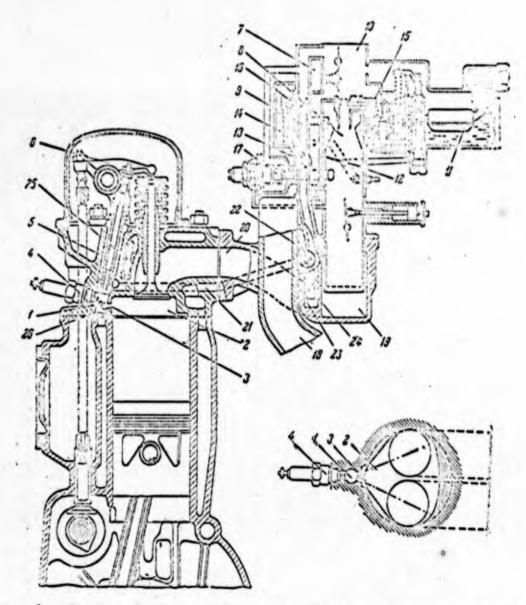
Design drawings of a precombustion chamber carburetor engine: 1 - precombustion chamber; 2 - main combustion chamber; 3 - passageway valves; 4 - spark plugs; 5 - precombustion chamber intake valve; 6 - intake valve rocker arm; 7 - common carburetor; 8 - cylinder part of carburetor; 9 - precombustion chamber part of carburetor; 10 - common air intake; 11 - common fuel chamber; 12 - throttle for cylinder mixture; 13 - valve for the precombustion chamber mixture; 14 - pull rod drive for throttle; 15 - jet tubes for cylinder mixture; 16, jet tubes for precombustion chamber mixture; 17 - winder valve; 18 - exhaust collector; 19 - intake collector; 20 - cylinder mixture channel; 21 - precombustion chamber mixture channel; 22 - heat receiving ribs; 23 - well for precombustion chamber mixture; 24 - well tubes; 25 - water distributing tube; 26 - spark plug electrode screen. the intake cycle. At ignition the precombustion chamber contains a resulting mixture whose air excess coefficient is computed by
